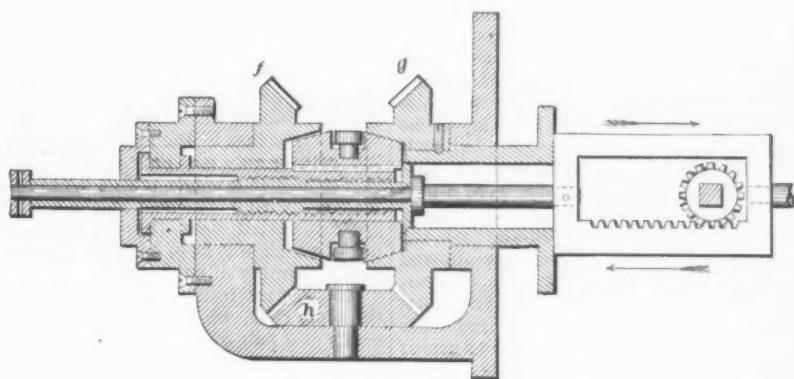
Longitudinal Section of Cam Shifting Device.
